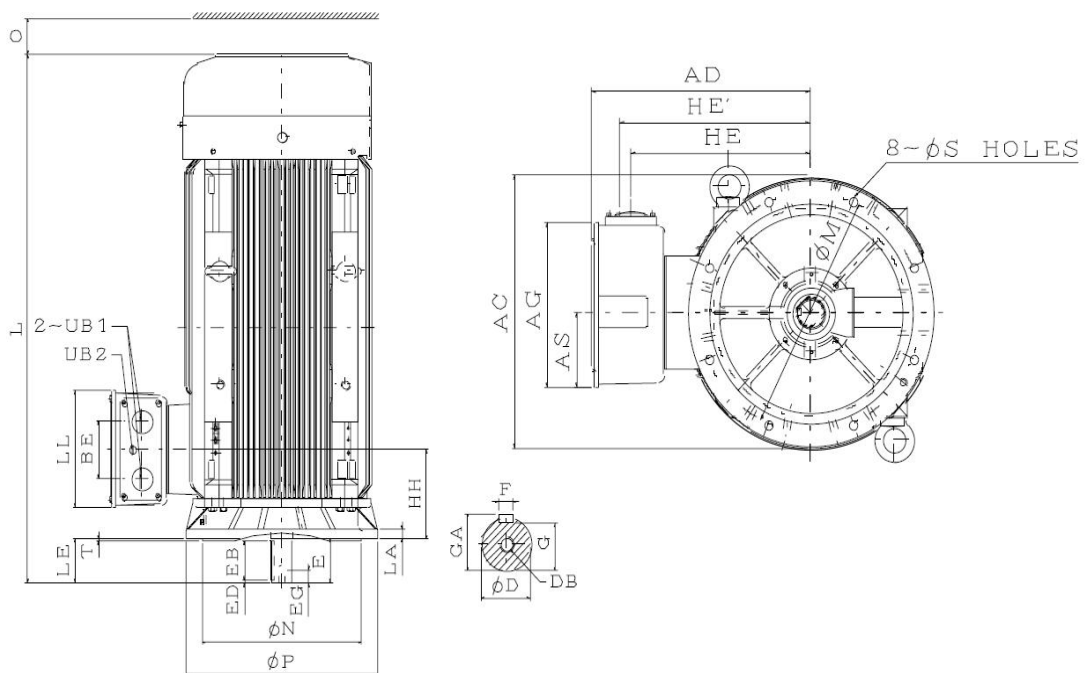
Outline drawing of cast iron design, mounting V1; frame size 315D
